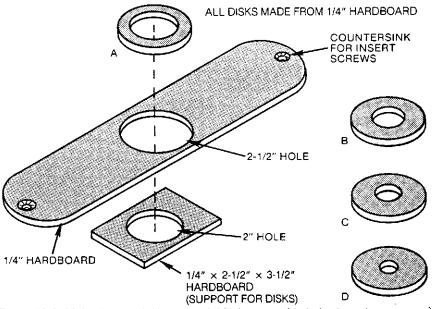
Make the special insert and drill the mounting holes by using a drum sander insert as a pattern. All disks have a 2-1/2" outside diameter and: (A) a 1-5/8" inside diameter; (B) a 1-1/8" inside diameter; (C) a 7/8" inside diameter; or (D) a 5/8" inside diameter.
